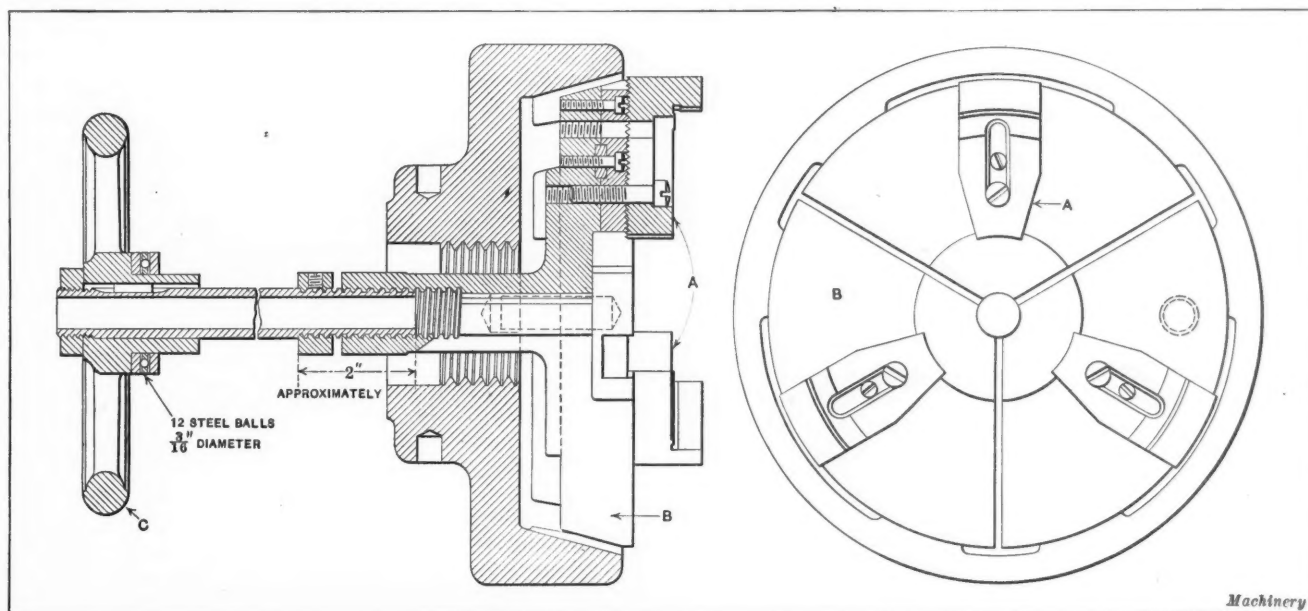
Combination Collet and Adjustable Jaw Chuck for holding Bushings, Gears, etc.
